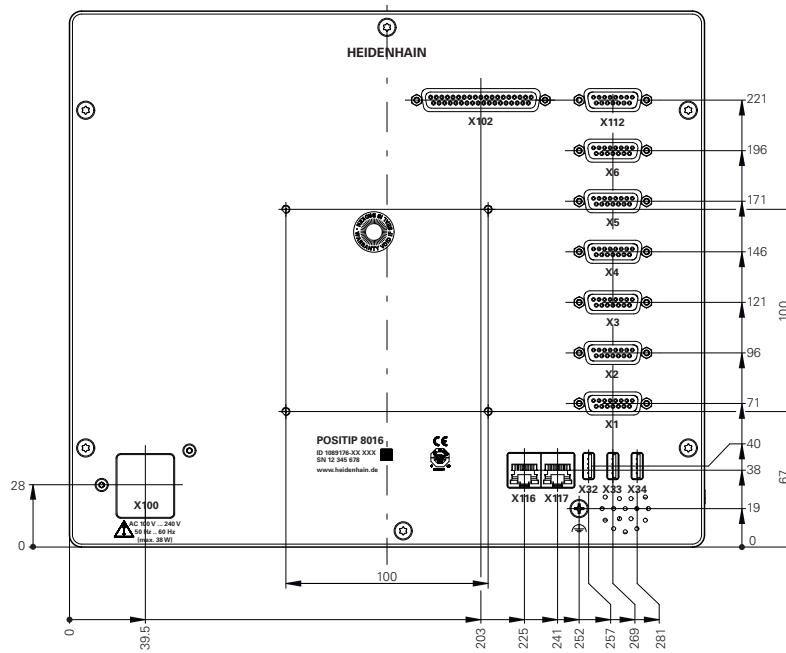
Dimensions of the rear panel for devices with ID 1089176-xx
